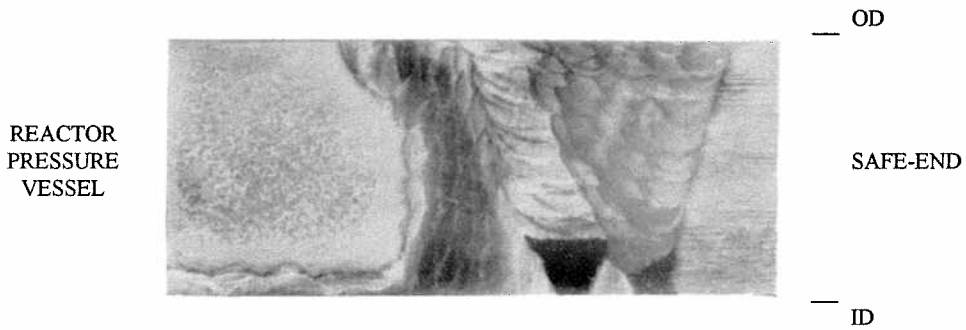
Macrograph of the dissimilar metal weld of Assembly 21
